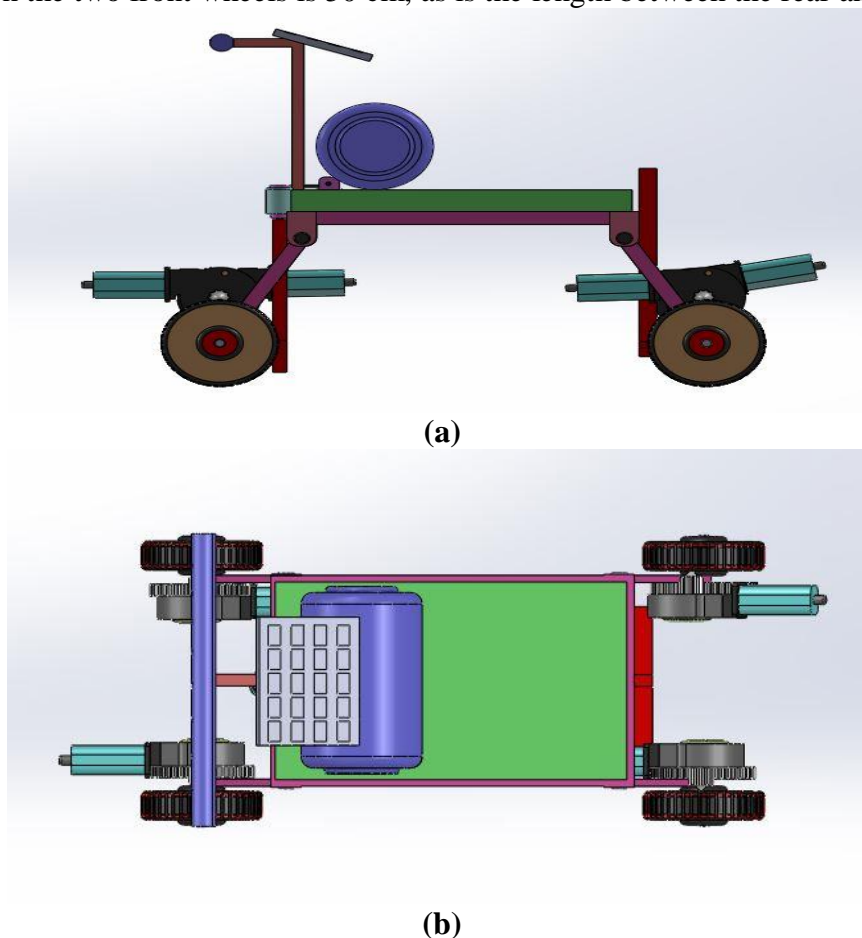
Model design using Auto-CAD (a) side view, (b) top view.
